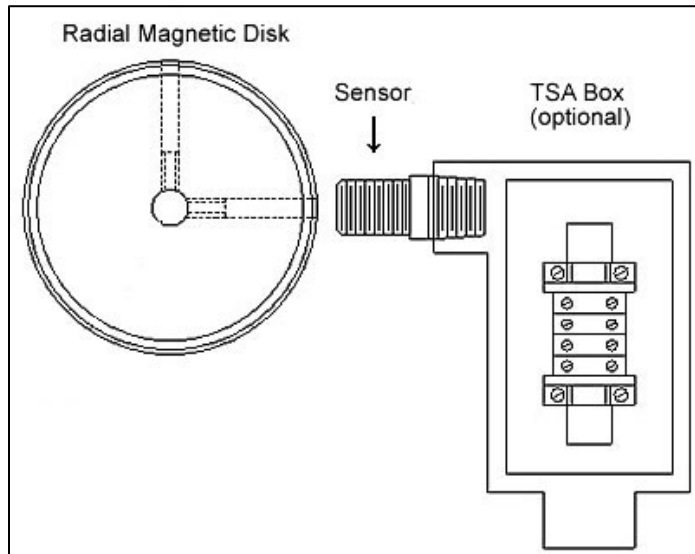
Sensor mounted with Terminal Strip Assembly (TSA) Box.
